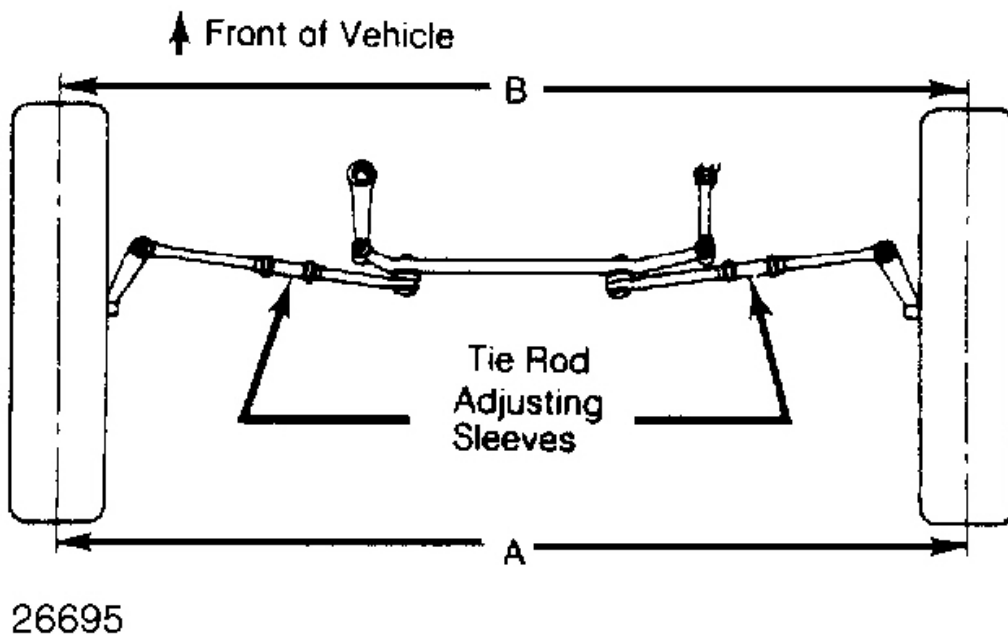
Adjusting Tie Rod Sleeves (Top View)
